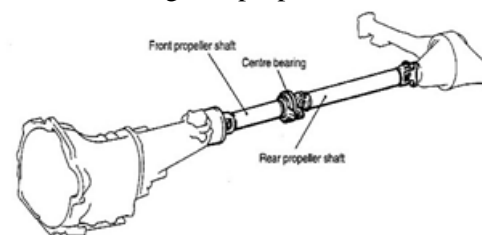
Propeller Shaft with Universal Hooke Joint and center bearing Assembly
